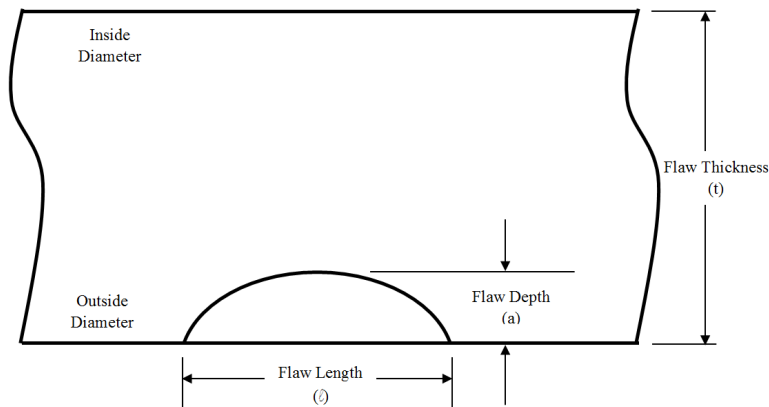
Illustration of SG to RCP Suction Nozzle DM Weld Outside Diameter Axial Flaw
